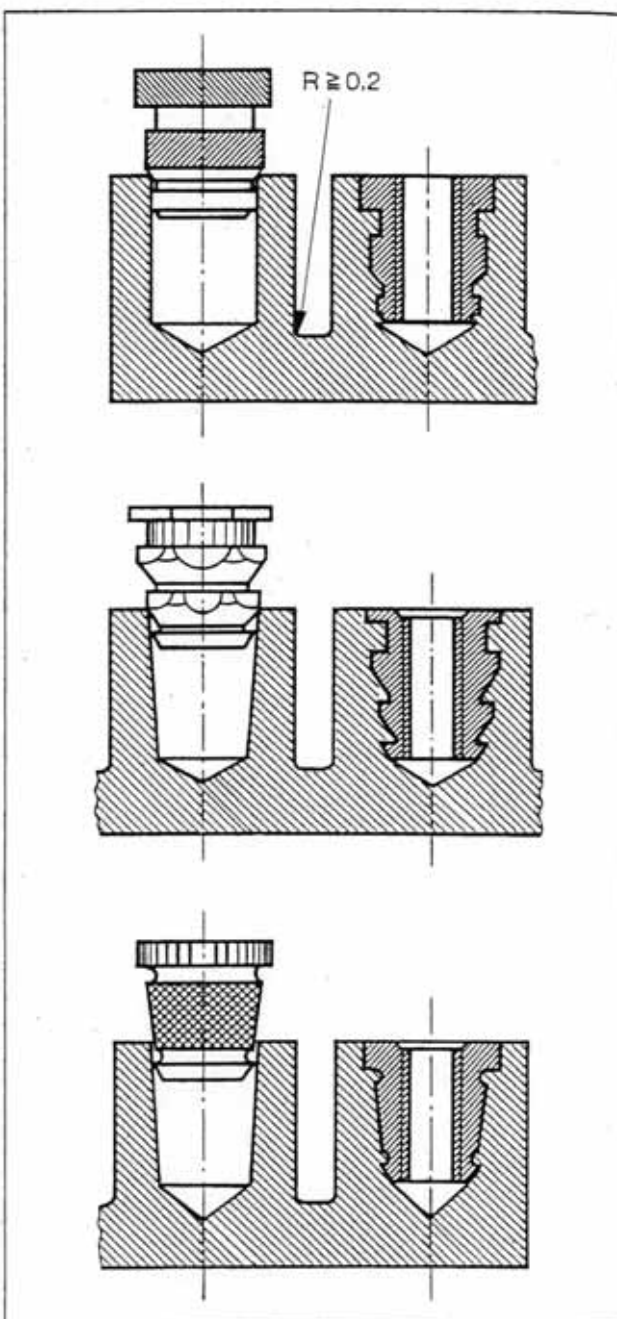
Plastic mouldings with injected eyelets for the insertion of metal parts.
